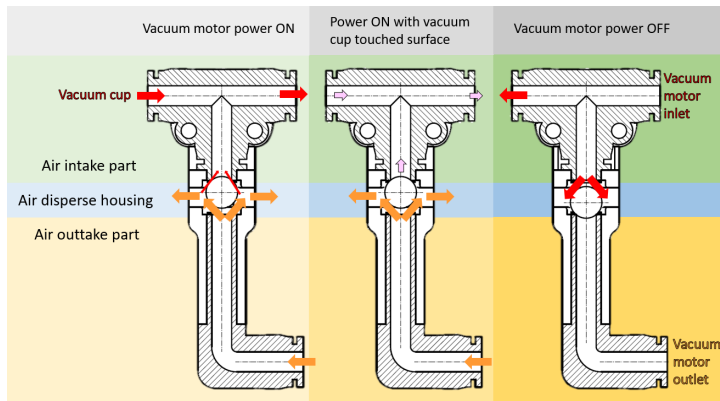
When the vacuum motor is turned on, the small steel ball is blown upward by the air from the outtake part and blocks the intake part. Since this air intake part is connected in parallel with the vacuum suction cup, the small steel ball will not be fully blocking the air intake part until the vacuum suction cup is attached to the surface.
